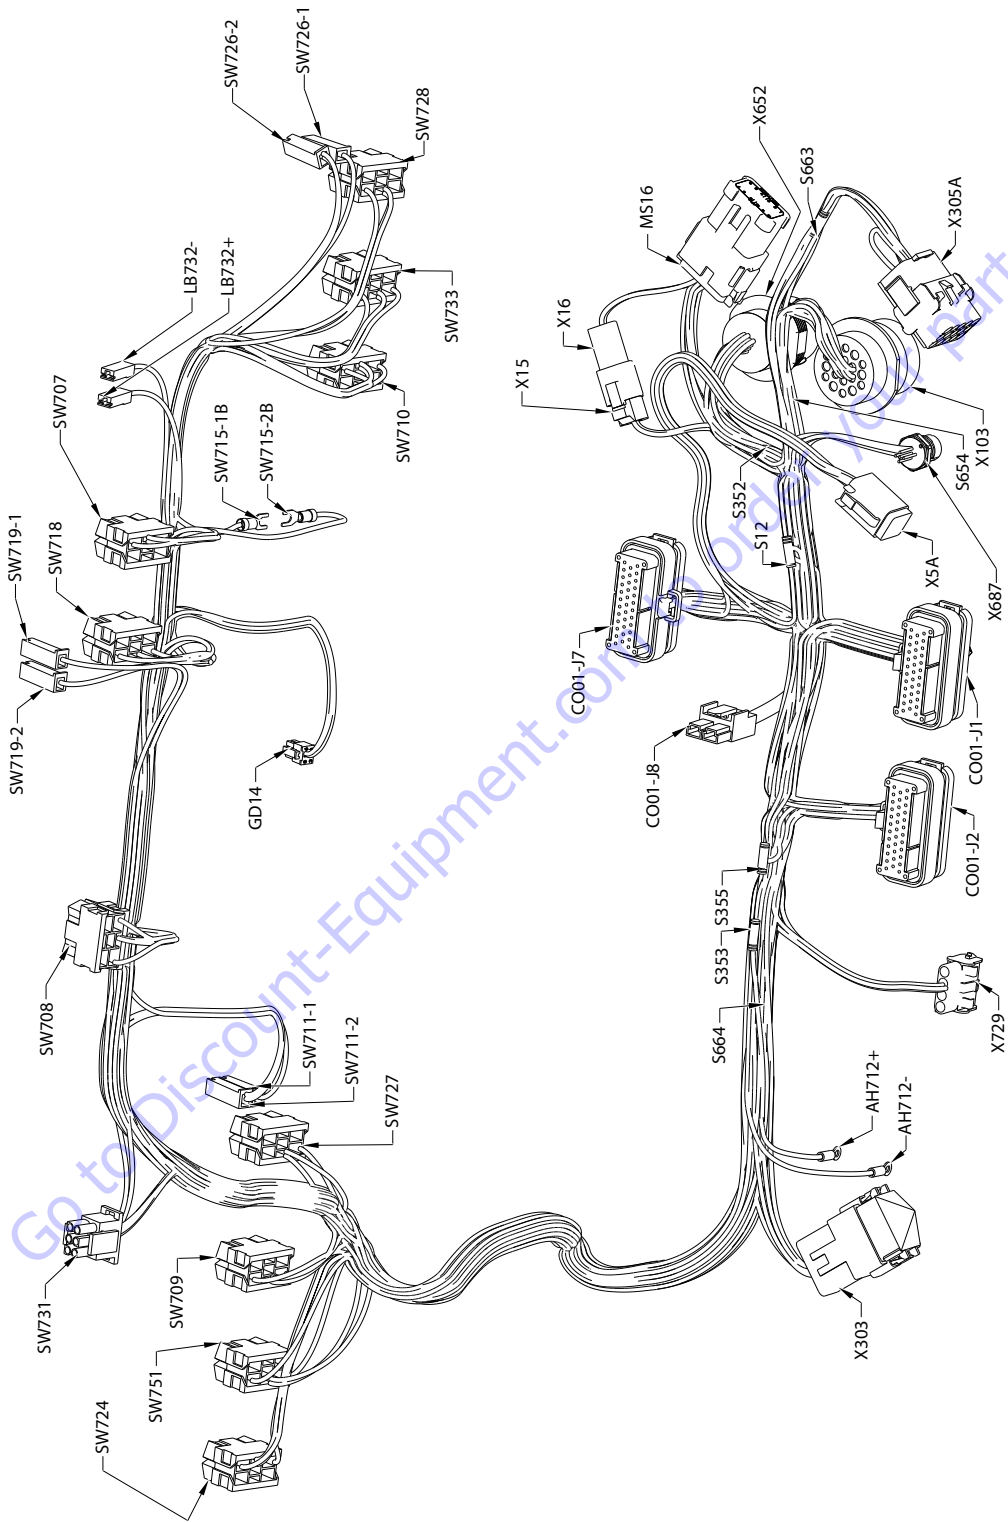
Platform Box Harness - Sheet 6 of 6
